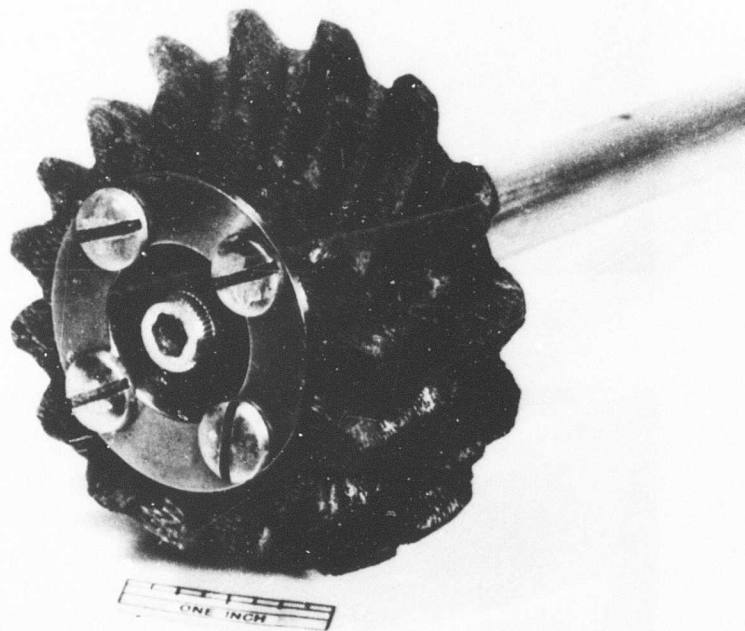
Coated Used Idler Gear After Simulated Battle Damage Test, Series 1A.
